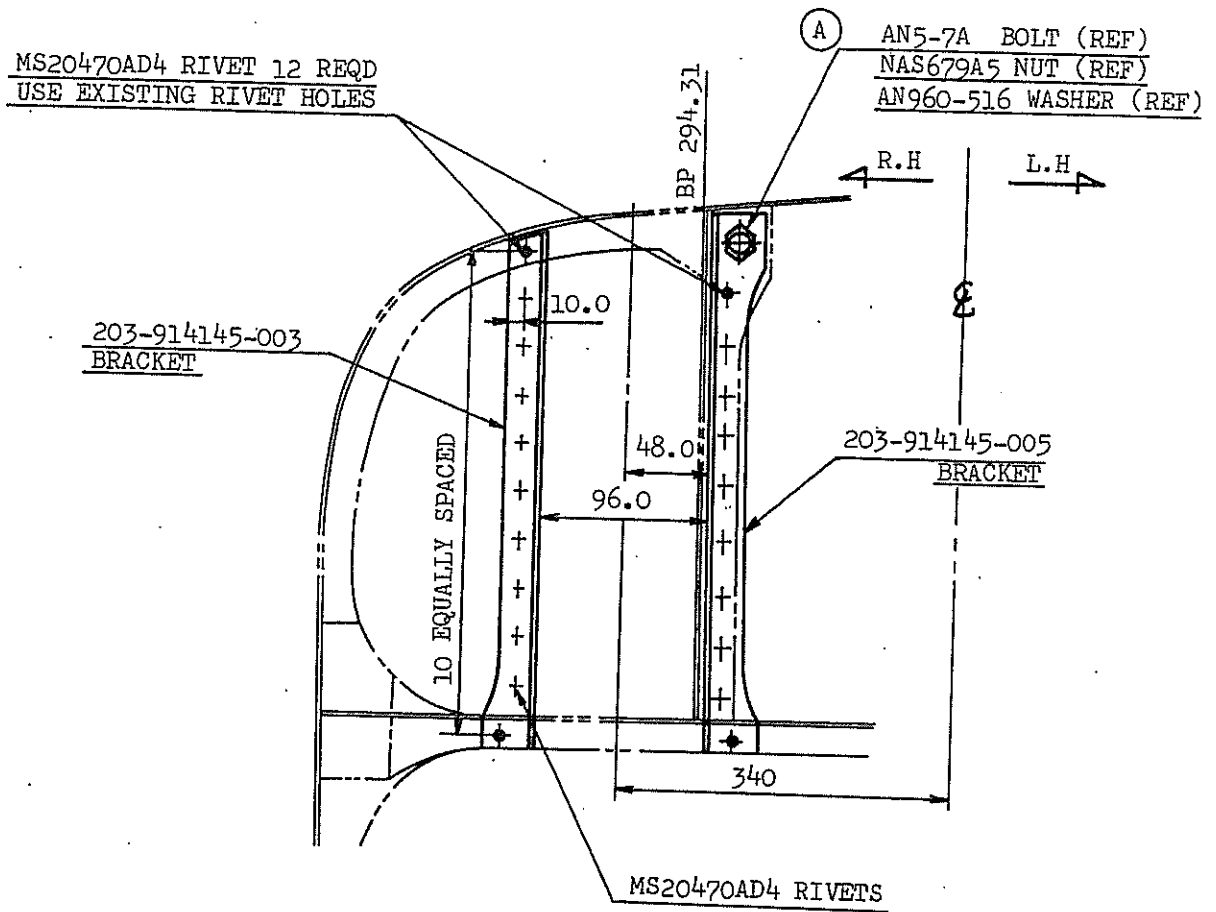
INSTALLATION OF BRACKETS ON FIRE WALL
